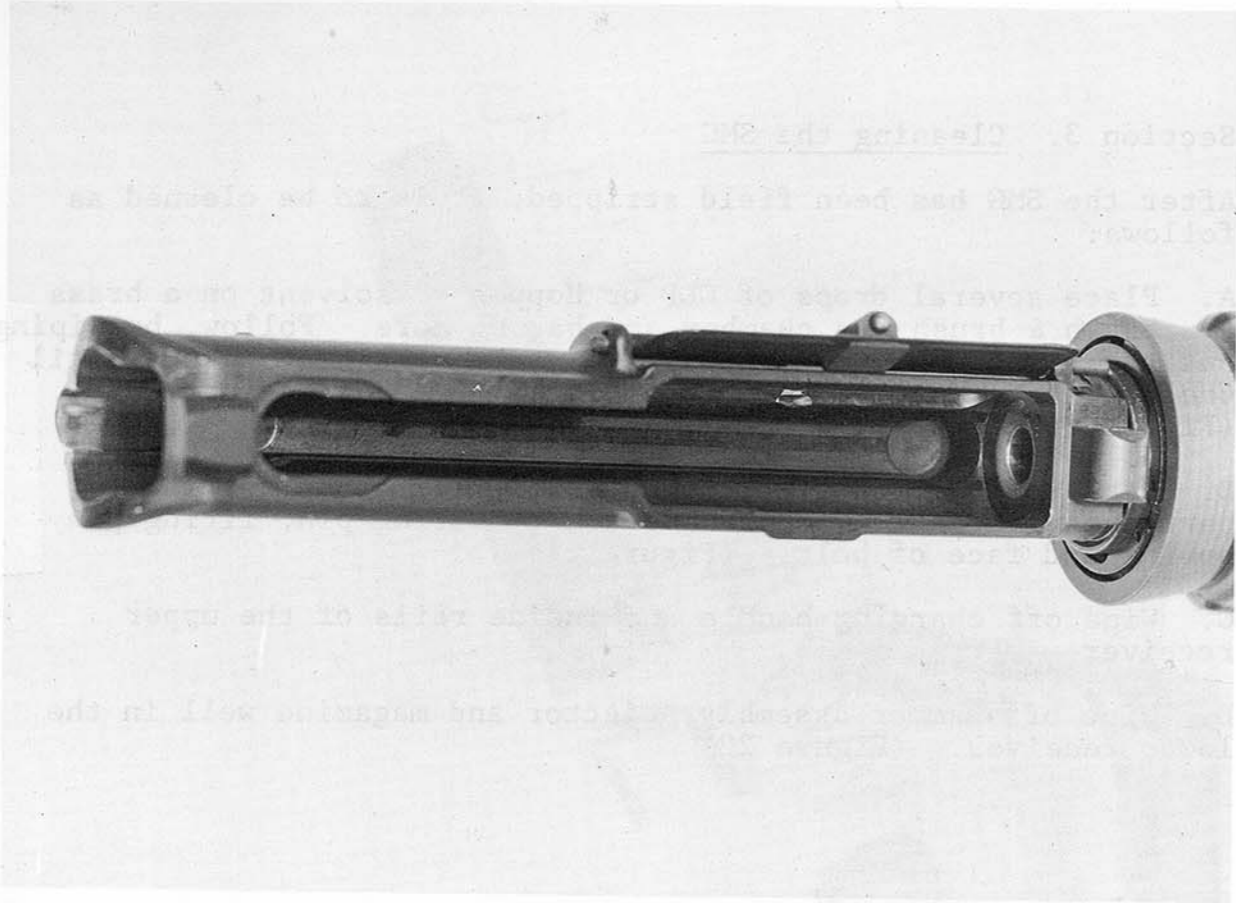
View of bottom of upper receiver showing chamber and inside rails
